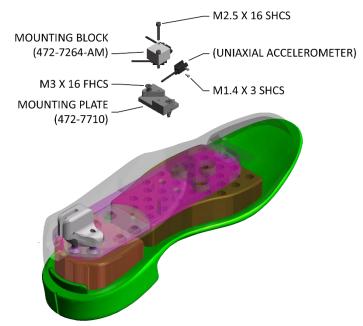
Mount the Foot Tri-Pack Mounting Plate, Accelerometer Block and Accelerometers
